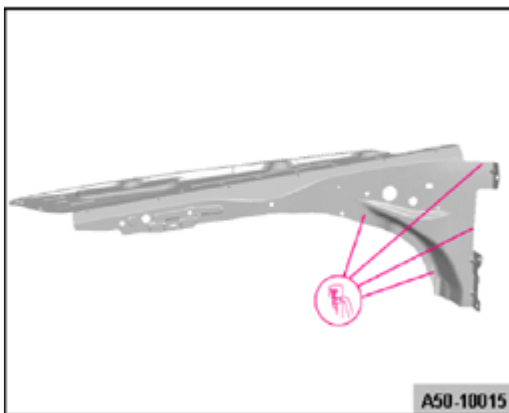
Punching Holes For Gas-Shielded Arc Plug Weld Seam
